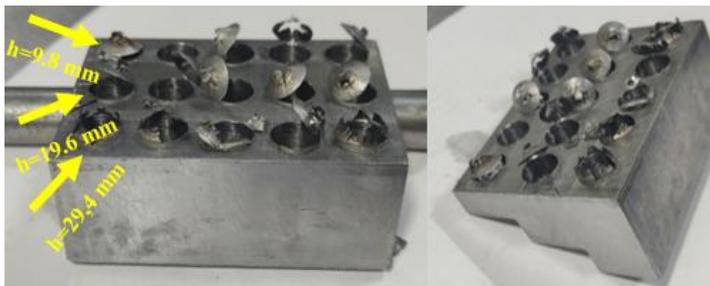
Burr formation that occurs according to the hole length that occurs in the drilled hole operation when there is tool run-out on the machine.
